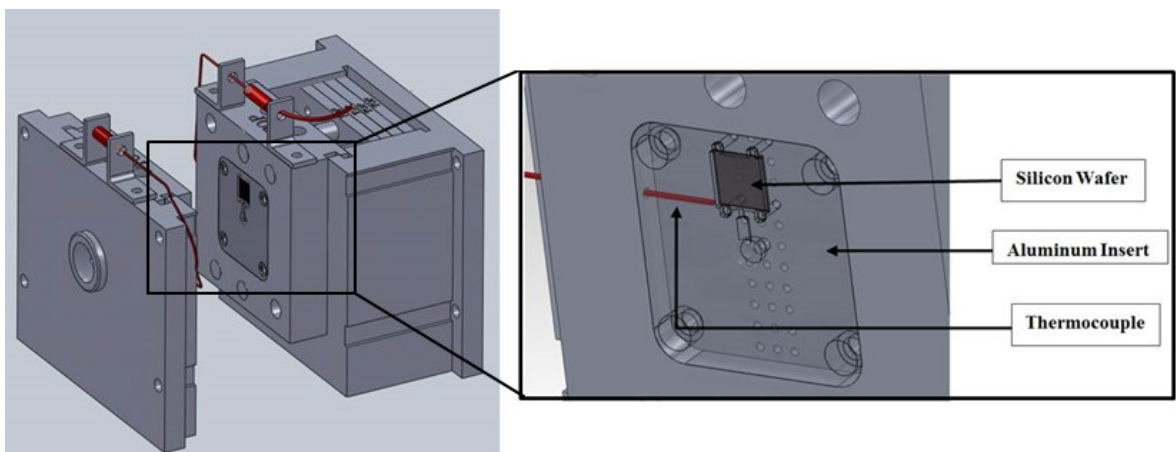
Full micromold assembly with wire thermocouples. Aluminum insert is transparent to show alignment of ejector pin holes.
